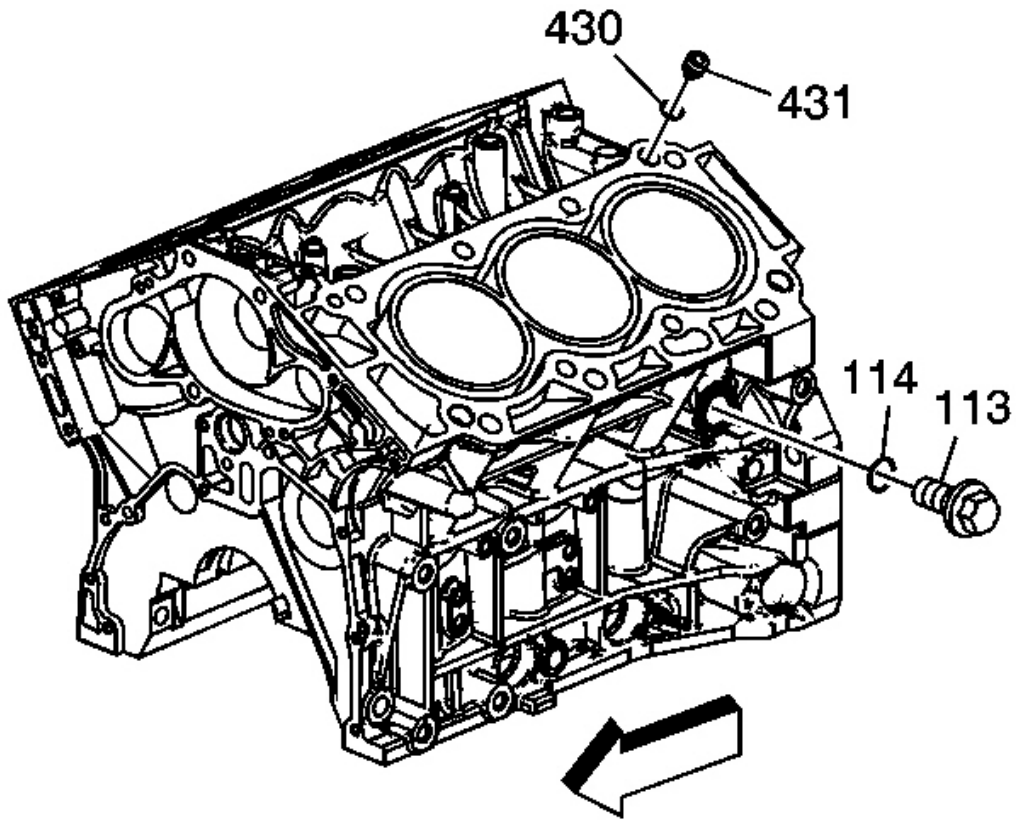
View Of Coolant Drain Plug, Washer, Restrictor & O-Ring
